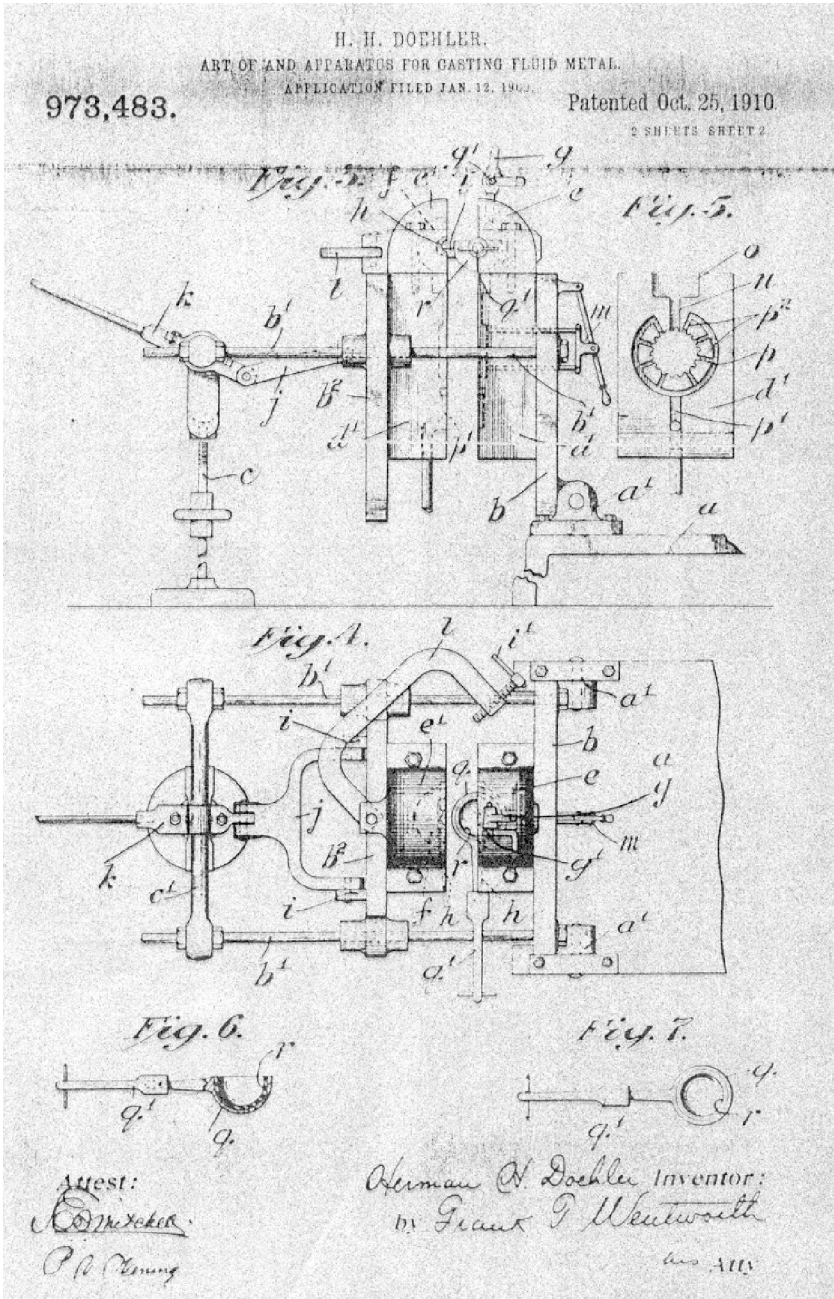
Diagrams filed with Doehler’s patent for a production die casting machine.
